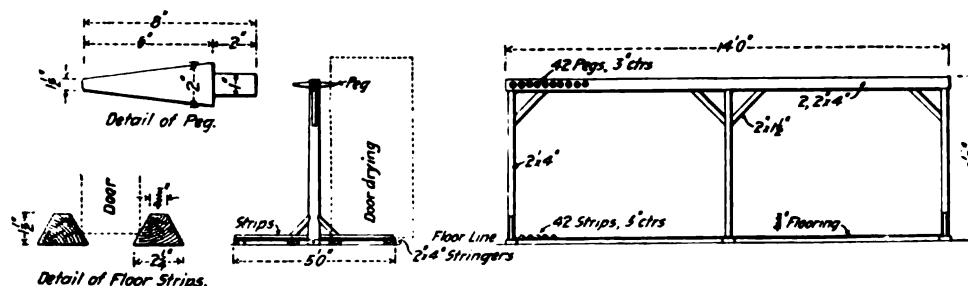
Details of Arrangement and Construction of the Rack System for Supporting Freshly Varnished Doors.
